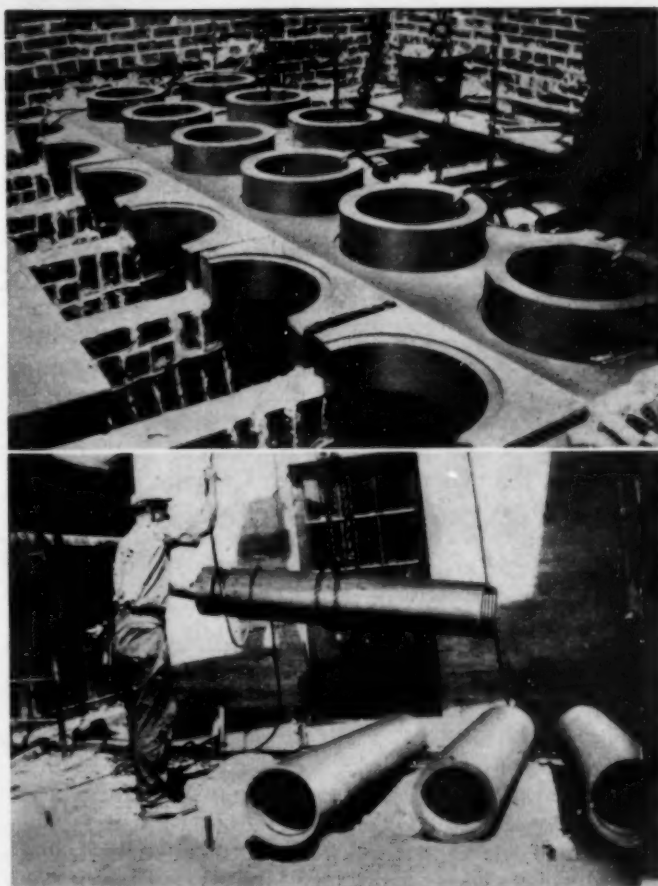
Tubes Are 6 Ft. in Length With Threaded Joints. Sections Are Joined by Lowering the Upper Member Upon the Lower by Means of a Block and Tackle
